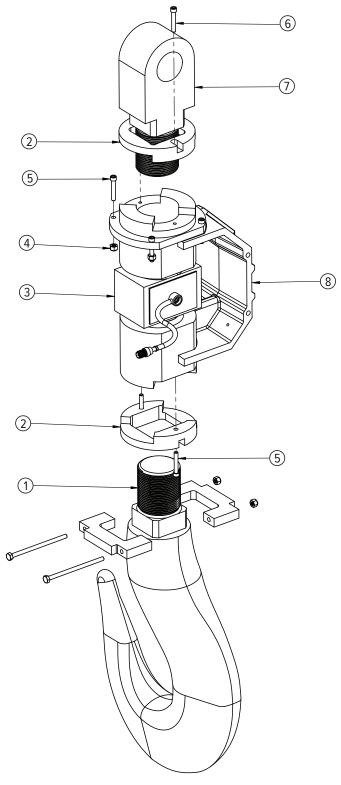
MSI-9600HT Mid-Section Assembly 30,000 lb
